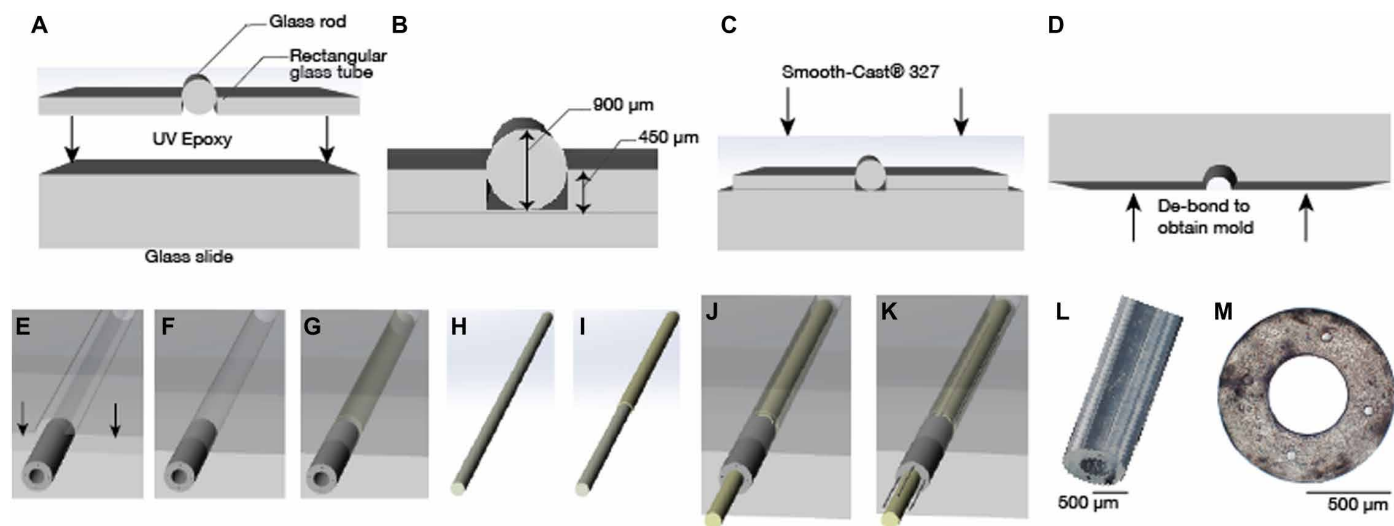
Steerable catheter tip fabrication process. (A) Circular glass rods (diameter, 900 μm) were placed next to 450- μm -thick rectangular glass sheets and (B) bonded to a microscope glass slide using UV epoxy. (C) Smooth-Cast 327 was poured over the assembly and, upon curing, (D) debonded to obtain one-half of the complete mold. The mold is formed by (E and F) clamping two such halves facing each other with a custom glass capillary tube (outer diameter of 900 μm , inner diameter of 400 μm , and four 50- μm channels in the wall) to provide alignment. Relatively stiff Dragon Skin 10 SLOW is first injected into the mold and then blown out with air to produce a thin layer (G) on the inside of this mold. (H) A 400- μm glass capillary tube is likewise (I) spin-coated with the same material and (J) introduced into the mold with (K) four wires that represent the fluid passages for tip steering. The vacant regions are filled with Dragon Skin 10 SLOW mixed with Hexane. The result of this process is a (L and M) multilayer soft polymer structure.
